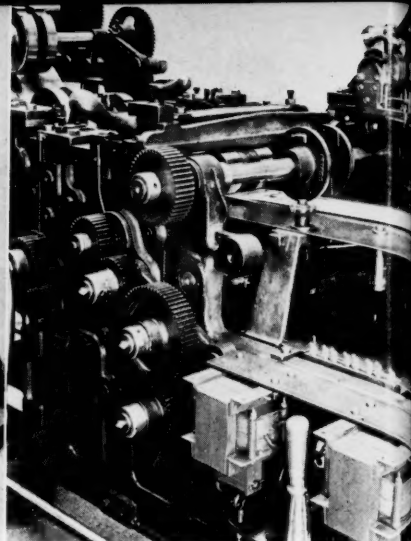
Control solenoids and reversing friction drive in foreground; selector switch at upper right. Courtesy Potdevin Machine Company
